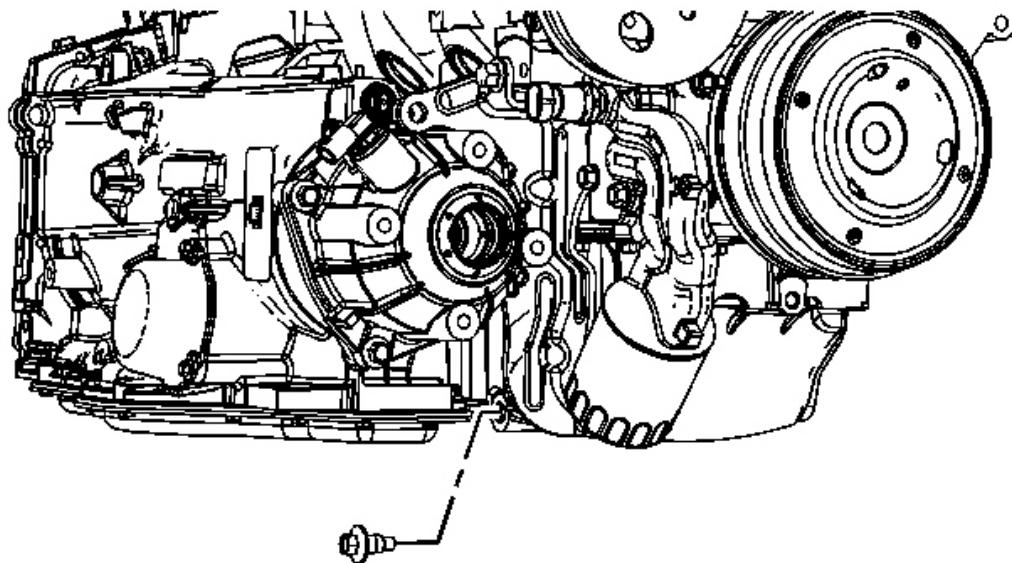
Identifying Oil Pressure Sensor Connector
